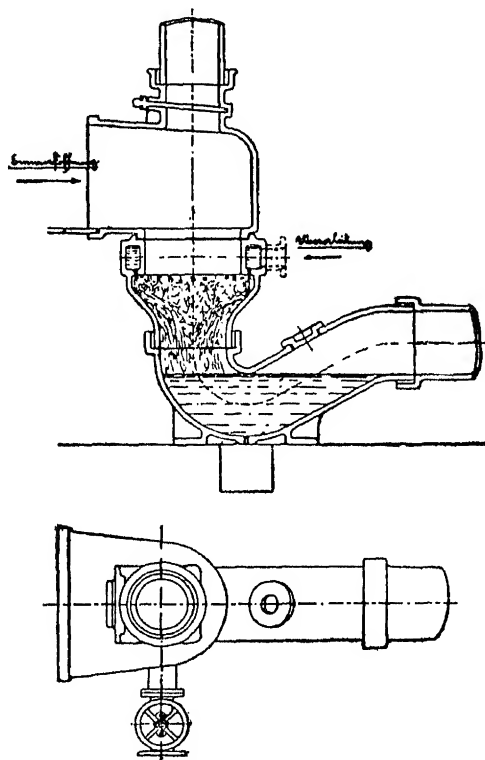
Selwig & Lange Guncotton Conveyor.
